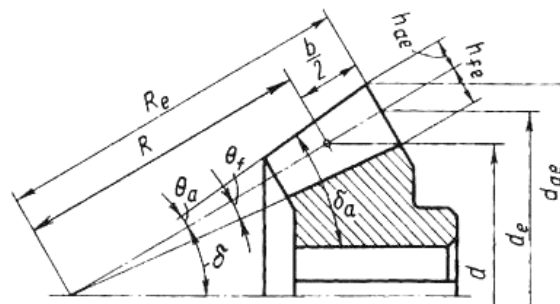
Scheme for calculating the basic geometrical parameters of the bevel gear
